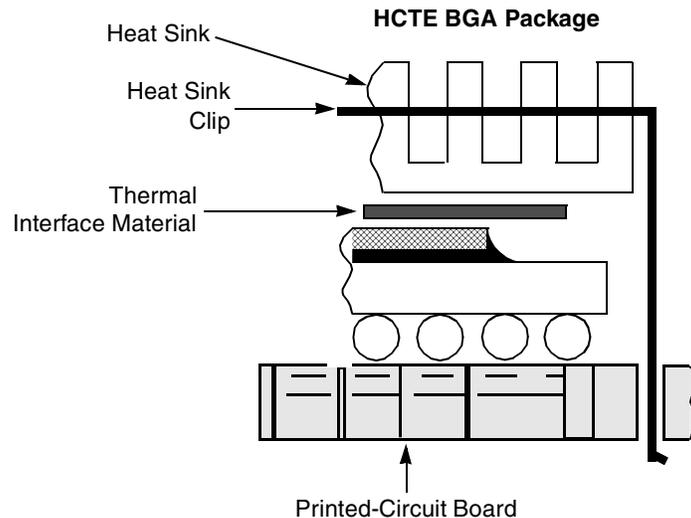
BGA Package Exploded Cross-Sectional View with Several Heat Sink Options
